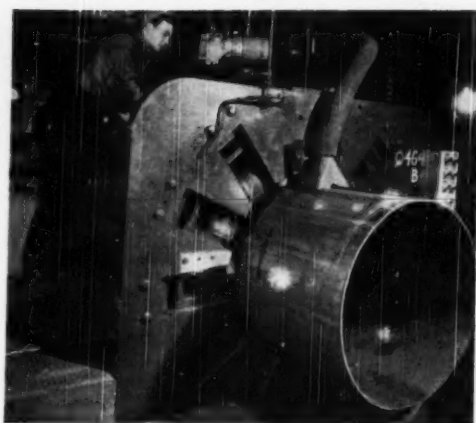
AN ELECTRIC WELDING MACHINE WELDS OUTSIDE SEAM ON A 30-IN.-DIAM STEEL PIPE
